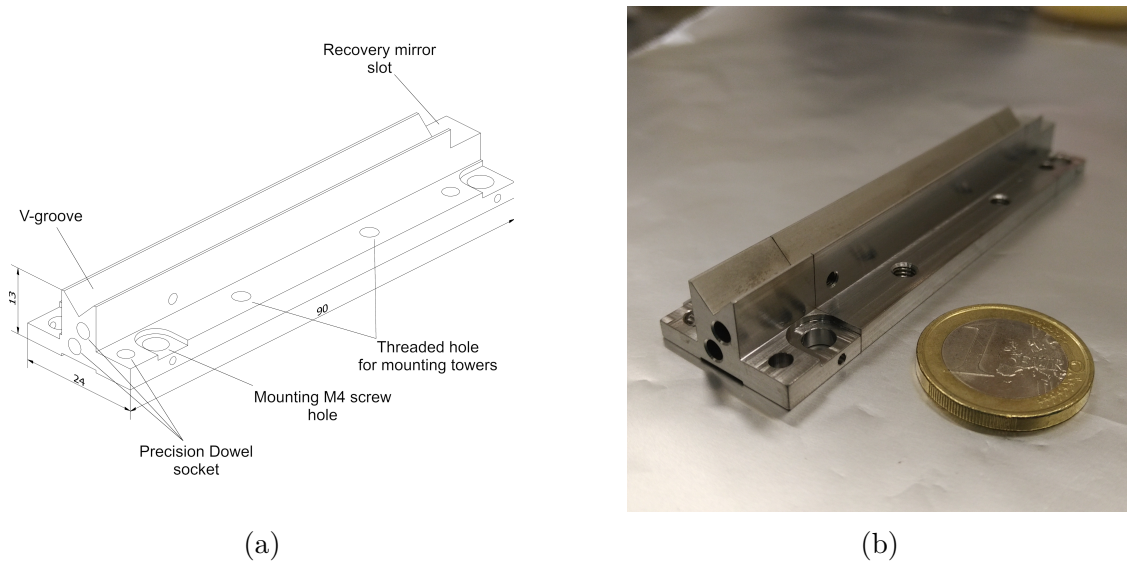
(a) 3D CAD view of the cavity supports. (b) Photograph of the machined titanium pieces.
